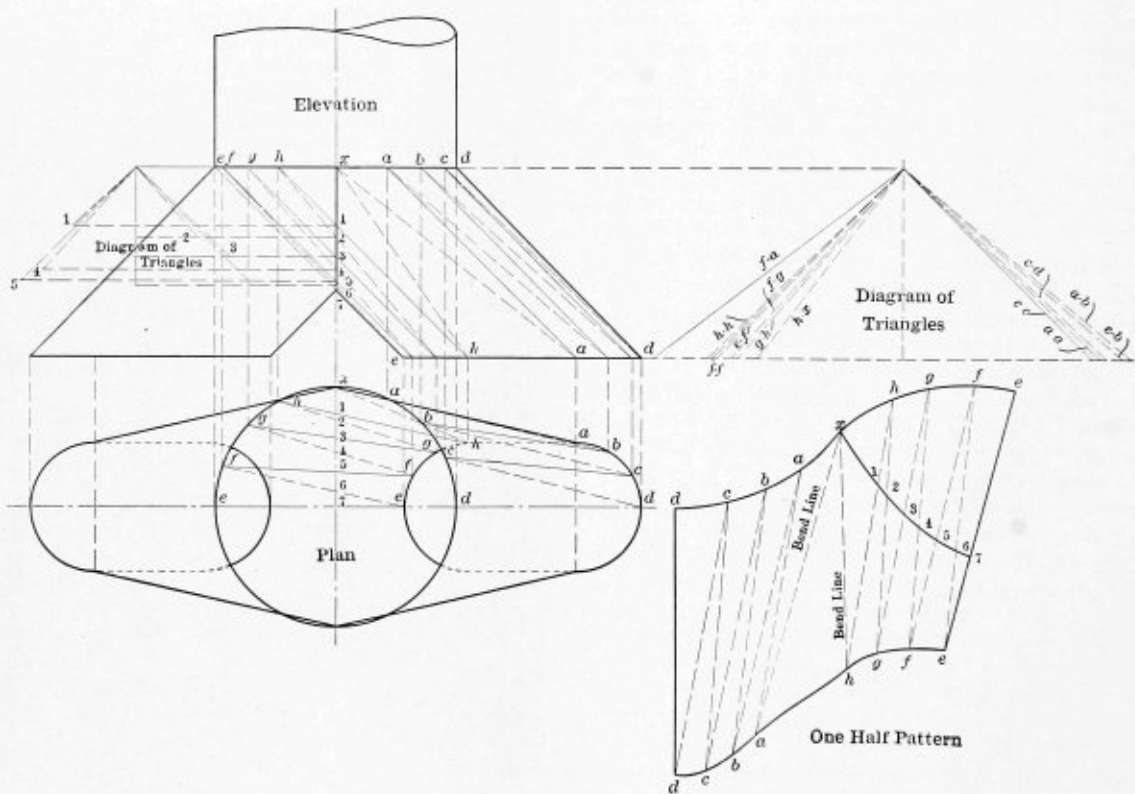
PLAN, ELEVATION AND PATTERN FOR AN ELLIPTICAL Y-PIPE CONNECTION.
